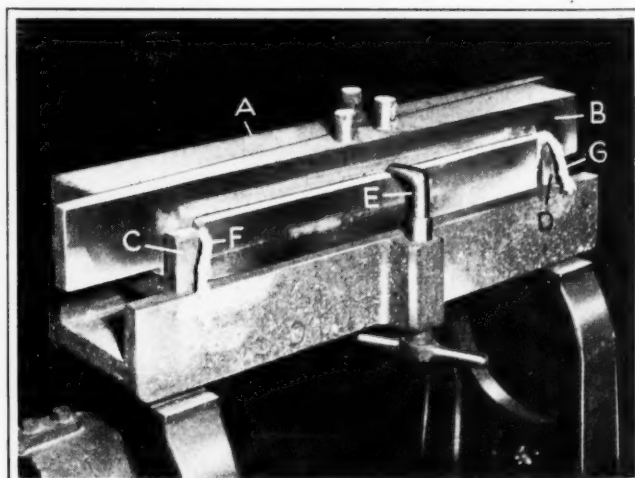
Wedge-shaped Blocks Overcome Difficulties from Shrinkage as the Cross-head Slippers Cool after the Babbitting Operation
